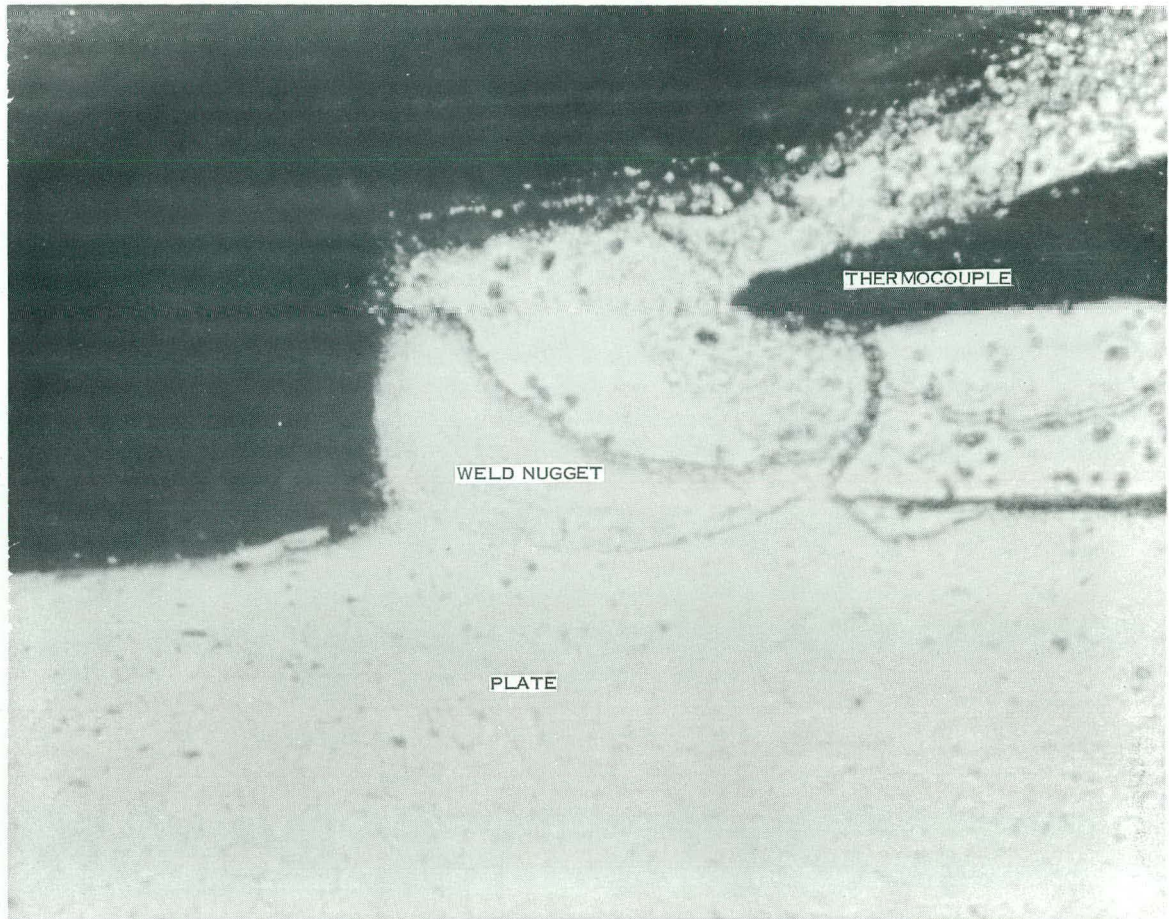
Weld penetration of 0.040-inch thermocouple resistance-welded to 0.030-inch plate.
